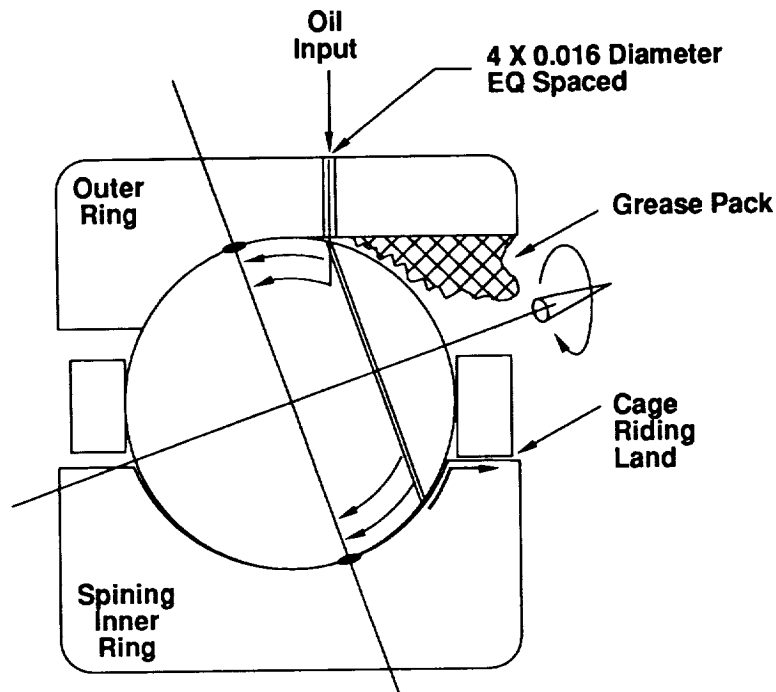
Nominal Bearing Geometry With Oil Holes (Option 5)
